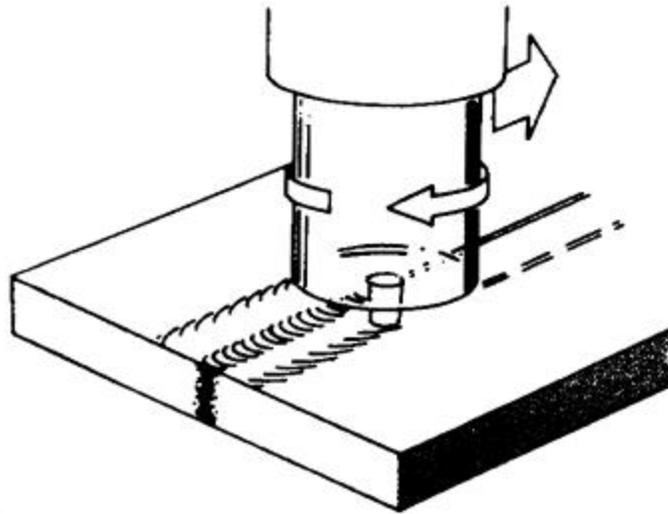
Schematic illustration of the friction stir welding process.
